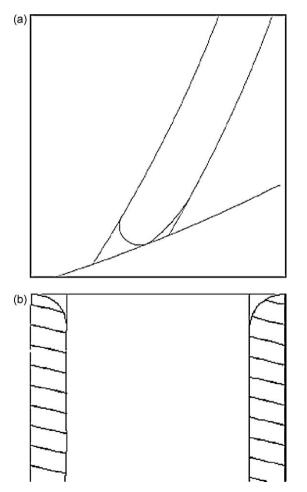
(a) Rounding of blades profiles at impeller inlet. (b) Rounding of hub shroud inlet edges.
